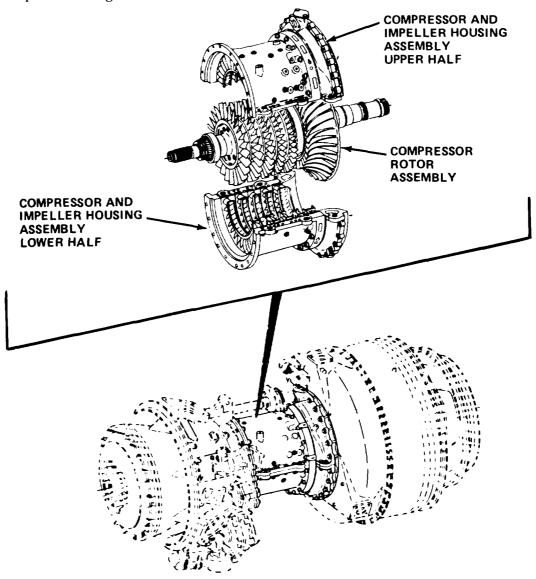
Compressor Section (T53-L-11 Series Engines)
